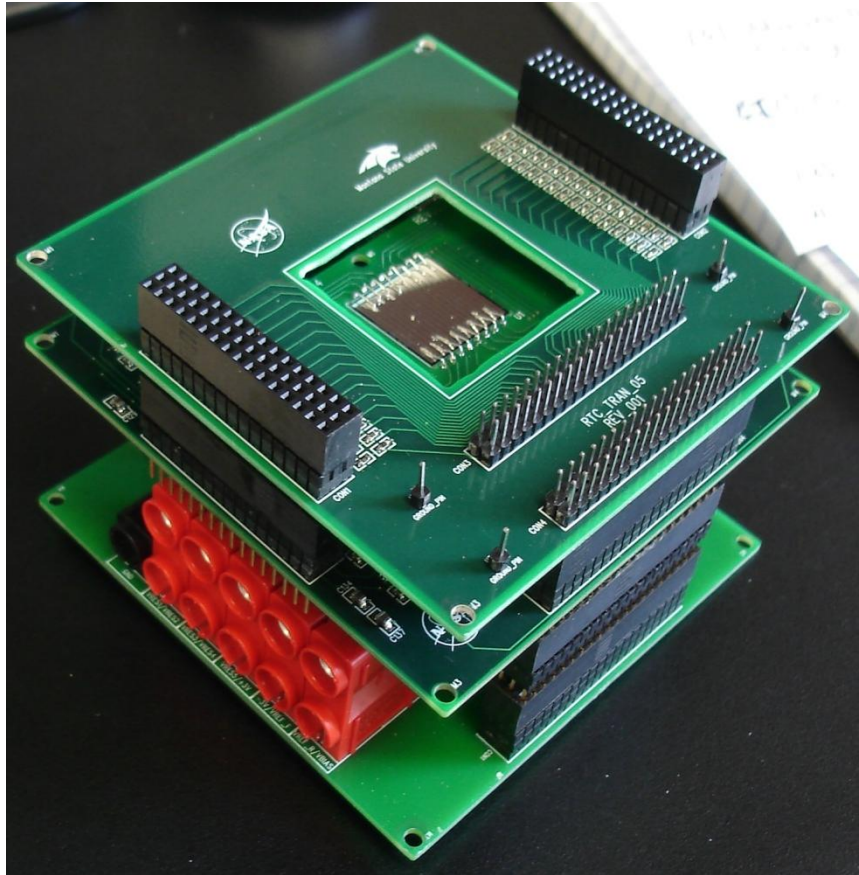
Picture of the stacked radiation sensor system assembly. Each board is a 4 inch square, with the entire stack standing about 2.25 inches high.
